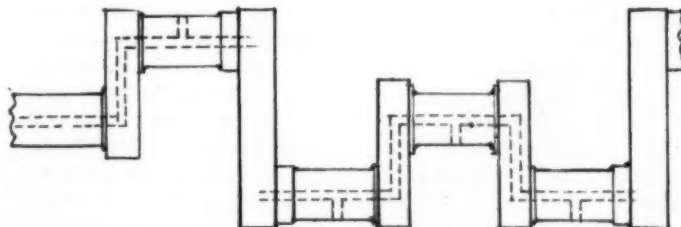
Section of crankshaft for four-cylinder motor, having three main bearings, and showing method of drilling crankshaft to lubricate connecting rod and bearings.
